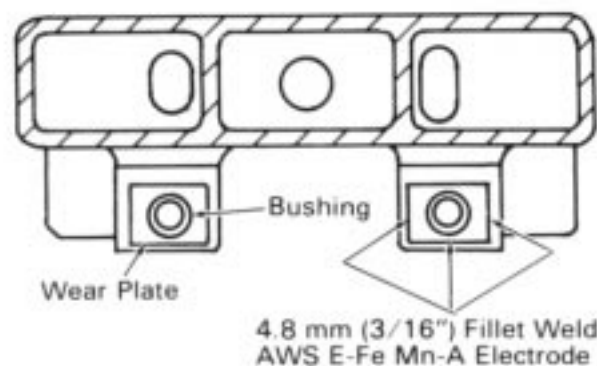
Applying Motor Suspension Lug Wear Plate (Top View Of Transom Cross Section)
